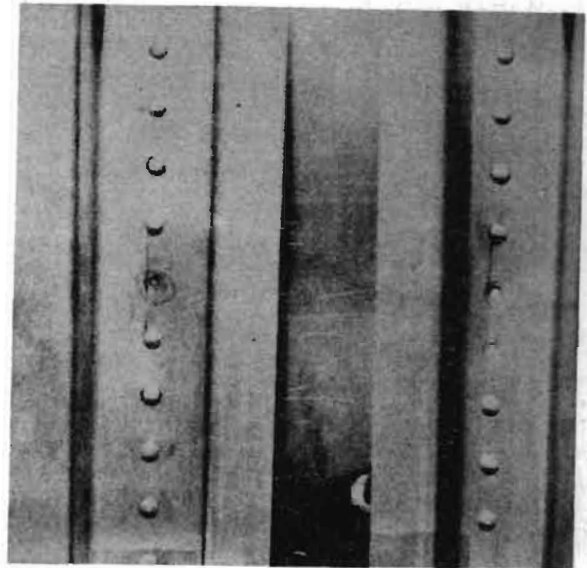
Another typical pattern of two cracks developed in two stiffeners provoking also the rupture of some rivets.
